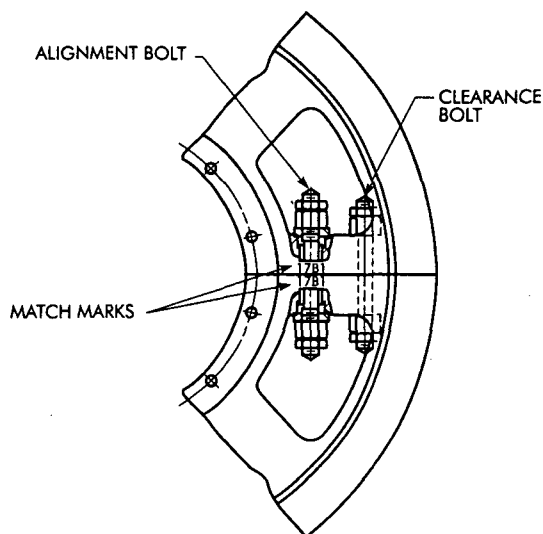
IDENTIFICATION OF MATCH MARKS ON SPLIT RING GEARS
